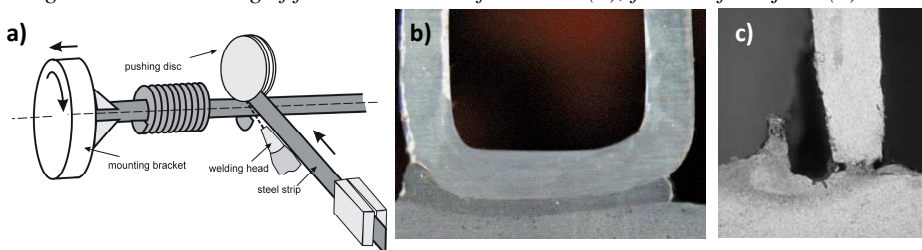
GMA welding of finned tubes with butt-weld (a), U-shaped fin-tube joint [19] (b); defective fin-tube butt joint (c)
